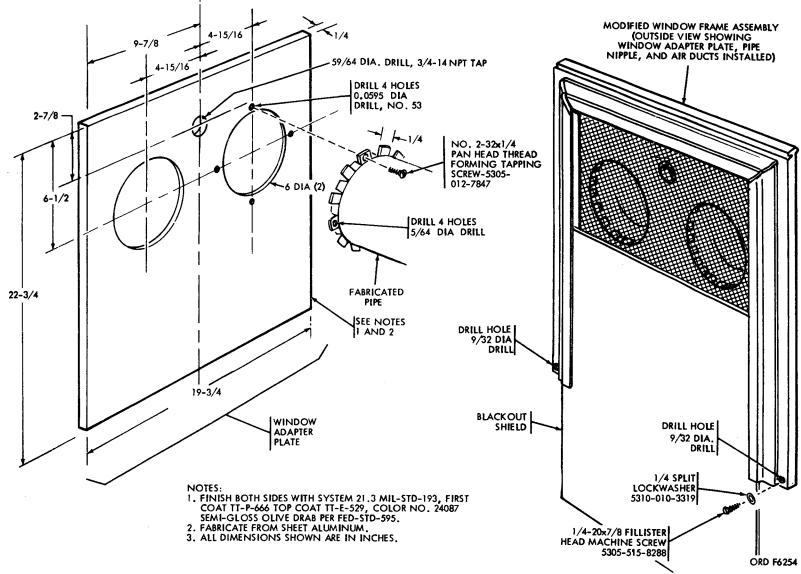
Modified window frame assembly and fabricated details for window adapter plate and pipe.
